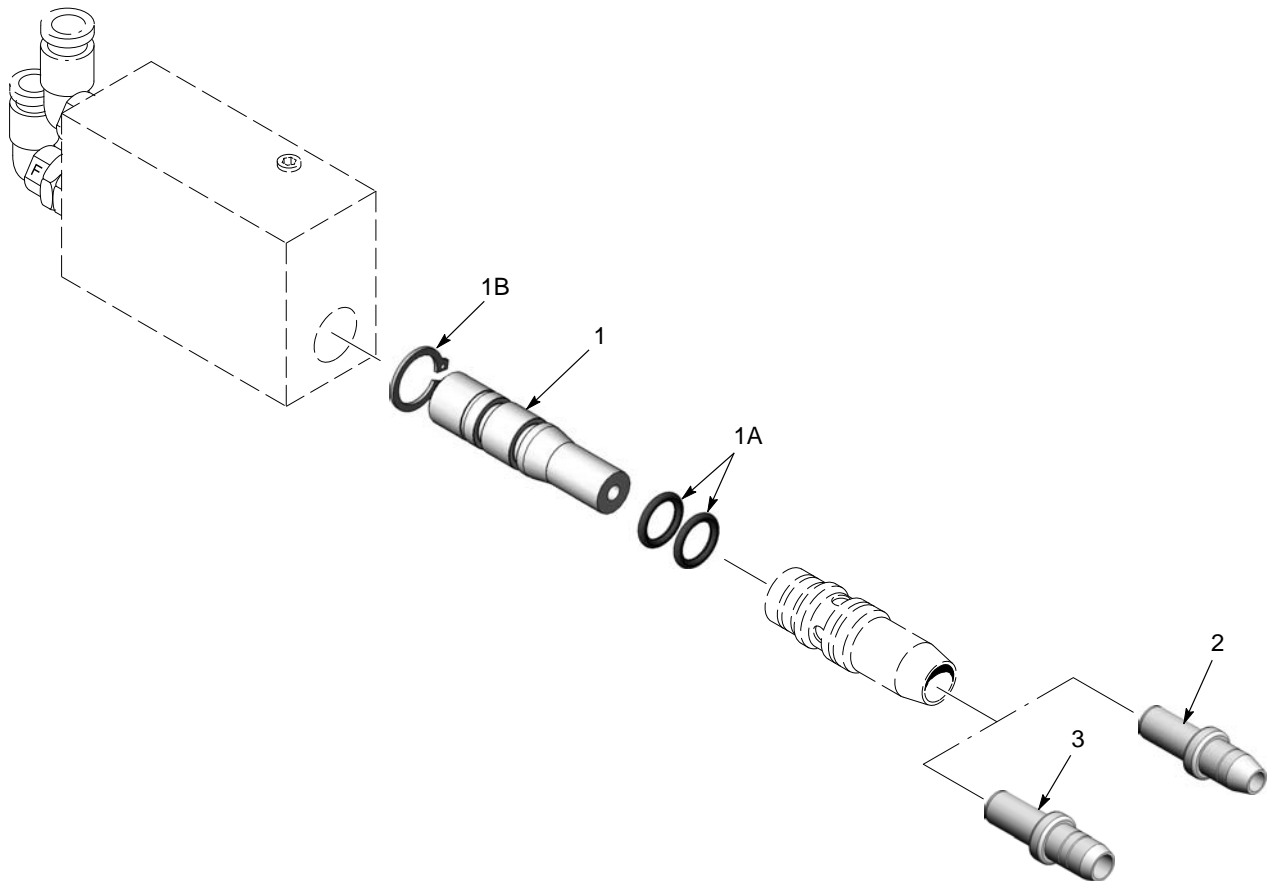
Container Coating Pump Venturi Throat and Tubing Adapters
